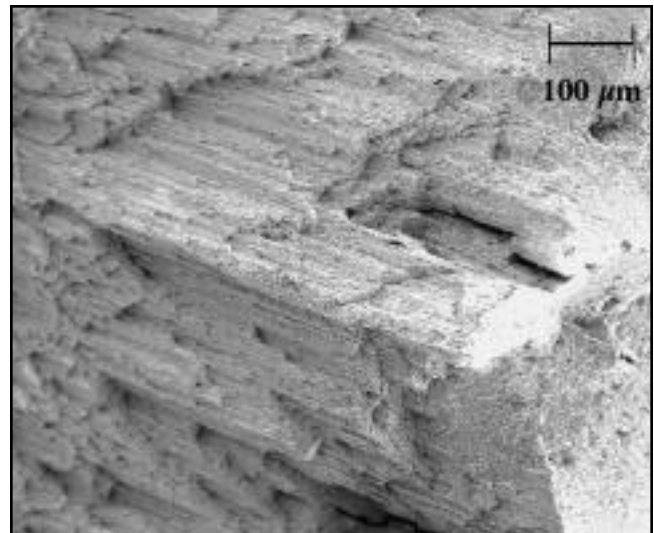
Fracture pattern for a nonwelded impact specimen (100X).
